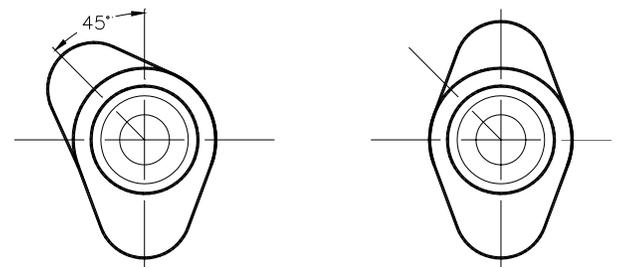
The first crankshaft – original flywheel mounting holes are not used..
